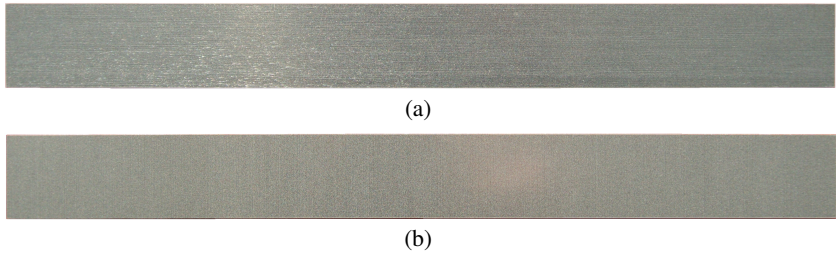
Laser cut Epstein strips (a) in, and (b) perpendicular to steel rolling direction.
